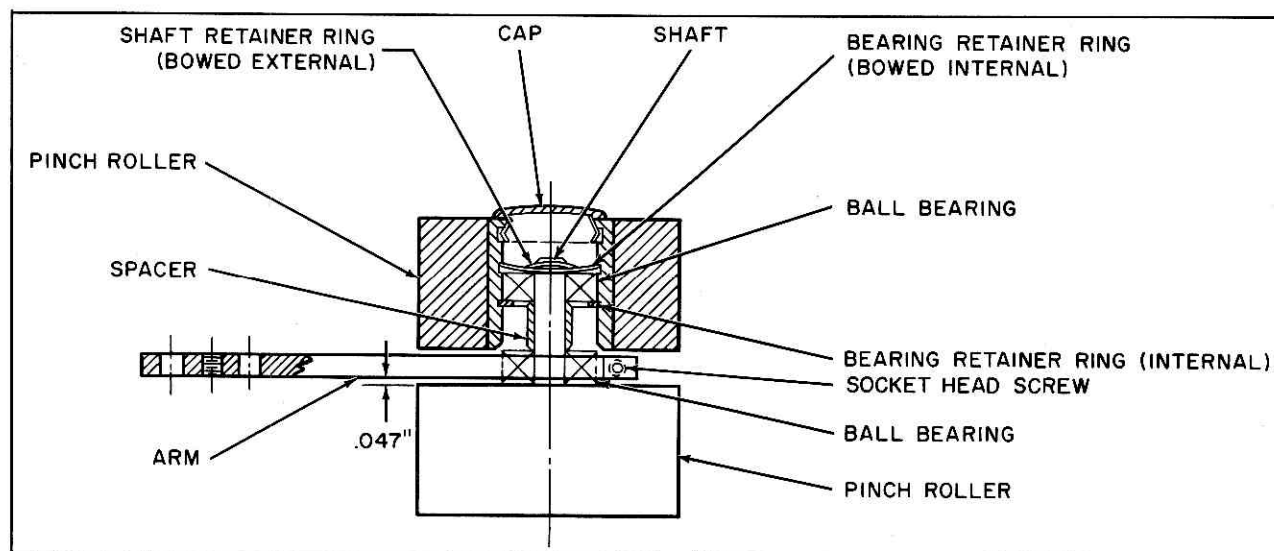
~~Capstan Pinch Roller~~ Capstan Pinch Roller
